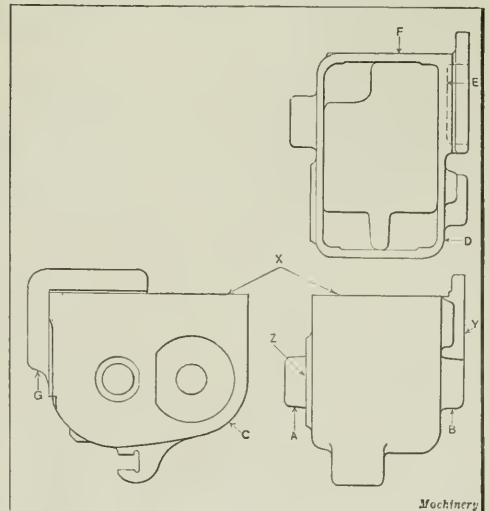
Outline of Gear-hox planed in Fixture shown in Fig. 9
